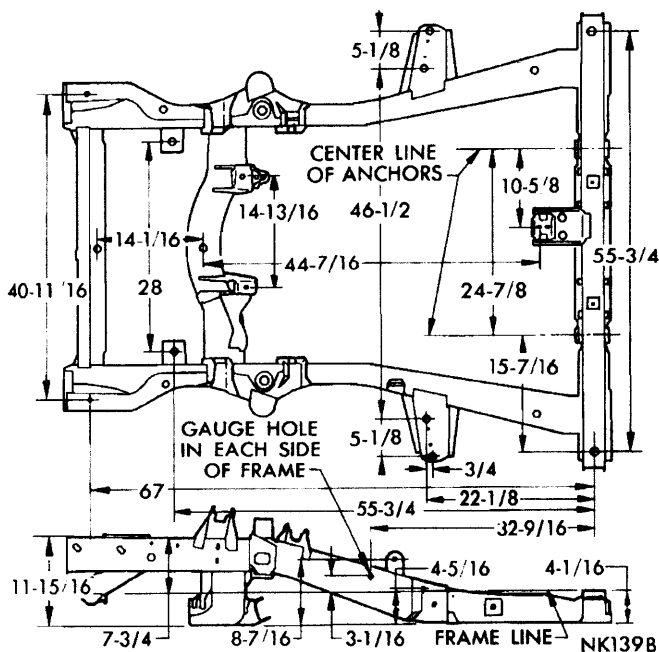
Frame Dimensions—Fury 8-Cylinder
